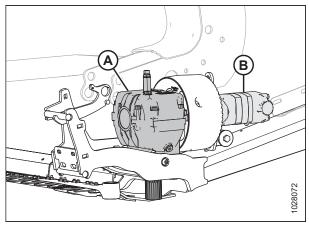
Left Knife Drive Box Shown – Right Similar
